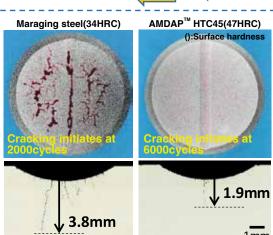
Heat check test results of deposited specimens (After 6000cycles, notch shape:R=6mm, depth:1mm)
